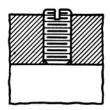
Plug may mar the shaft to the extent that disassembling might be impossible. The smooth surfaces of the hole are scored.
